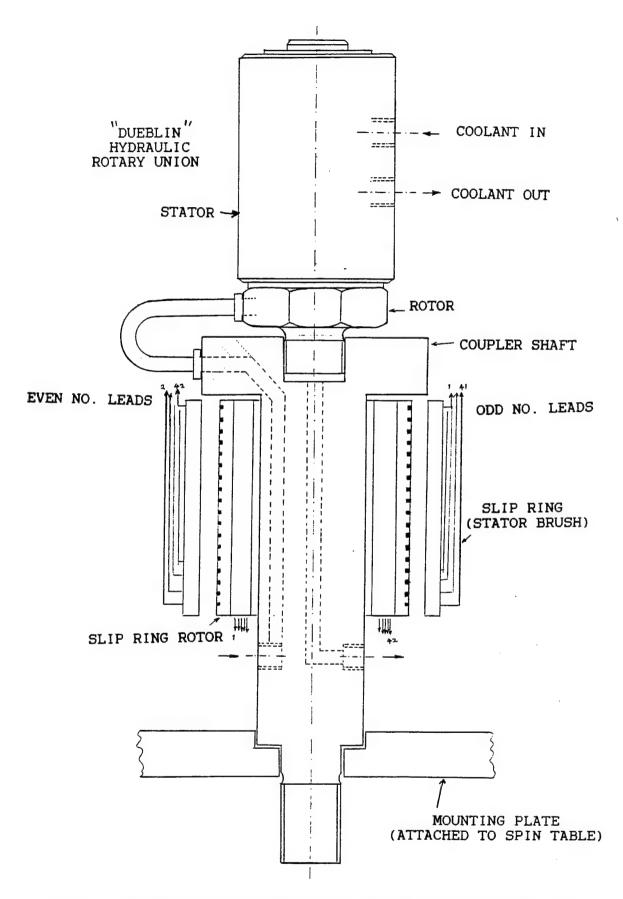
Slip Ring and Rotary Hydraulic Union Assembly for the Centrifuge Table.
